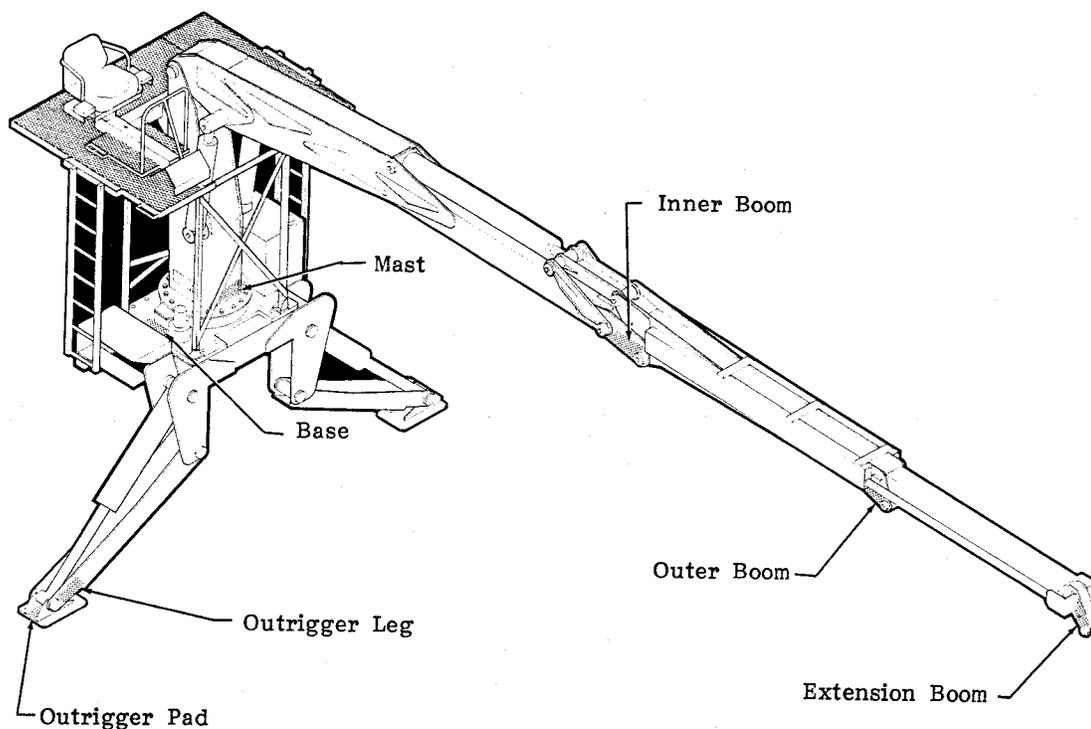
WELDMENT PART NUMBER LOCATION
